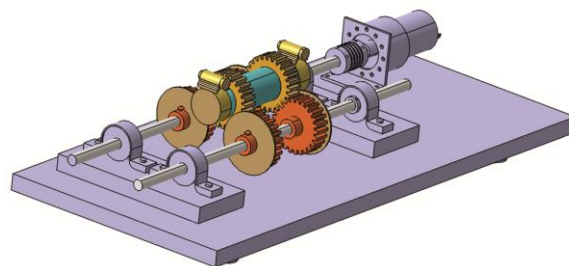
3-D View of Ball-milling using Catia V5 Software
